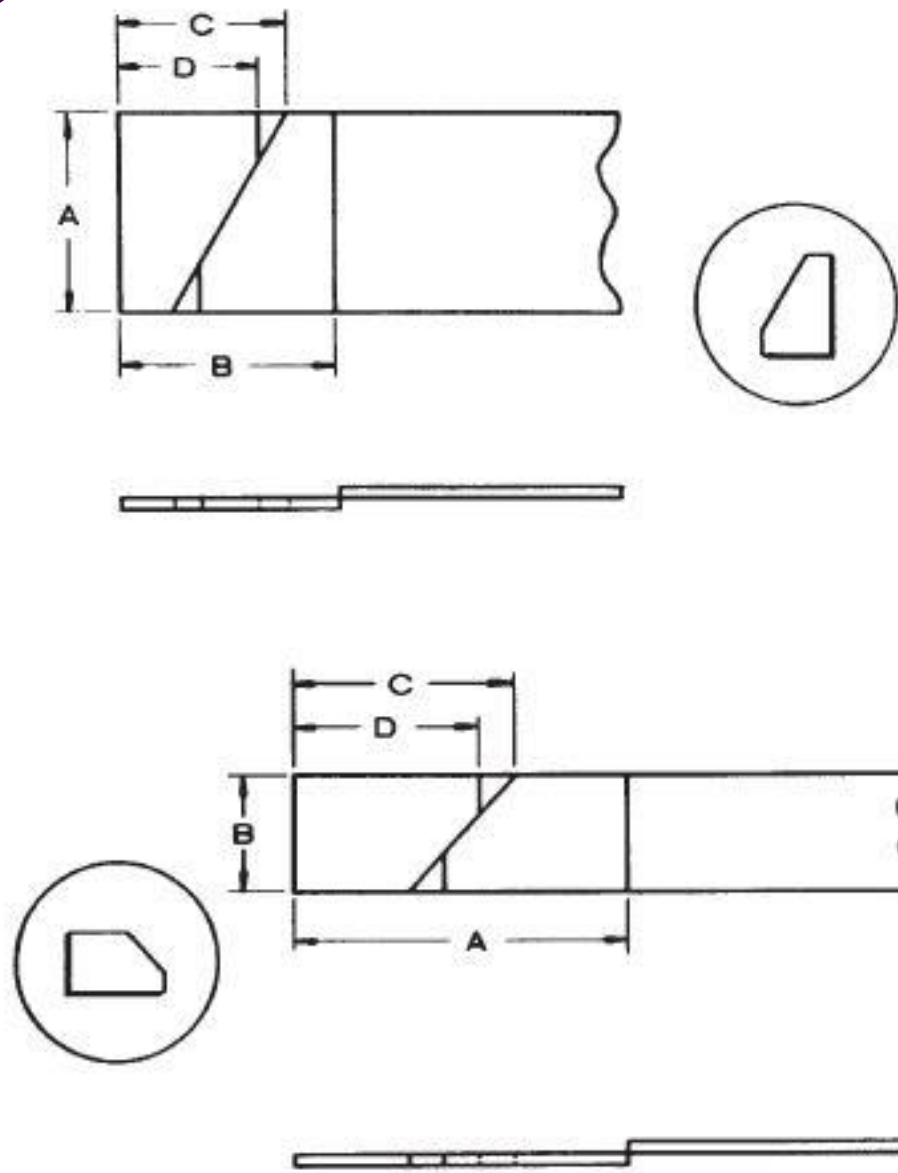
Blanks produced by added cutting of angular edge pieces.
